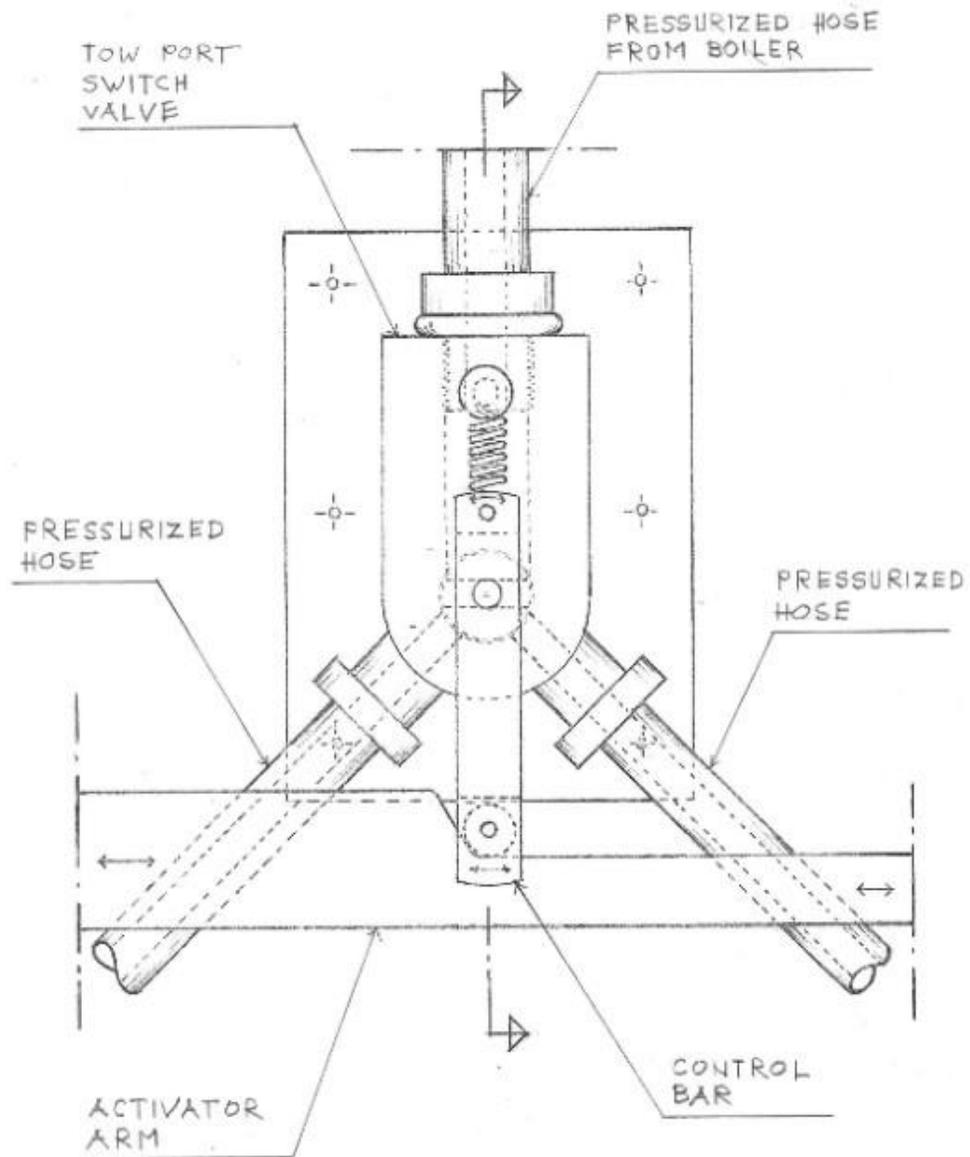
Front View of Two -Port Switch Valve used in Power Unit with Pistons
